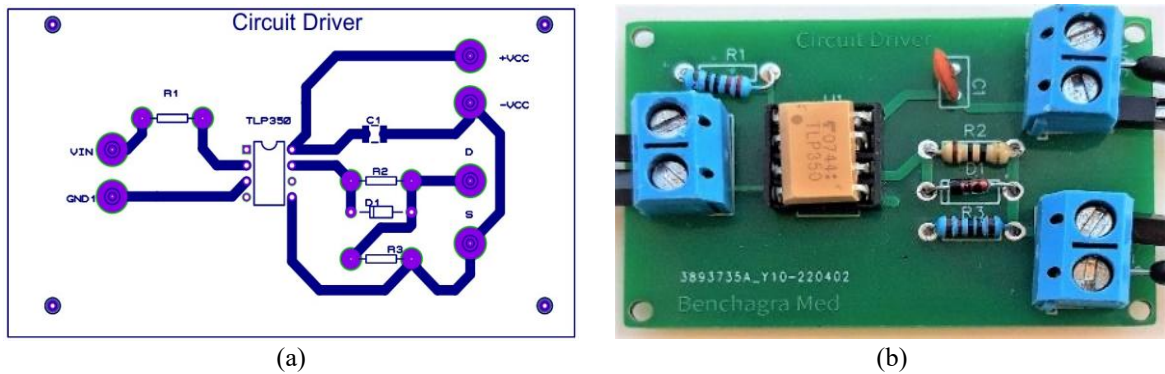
Design of MOSFET drivers: (a) PCB face component and (b) real circuit of driver
